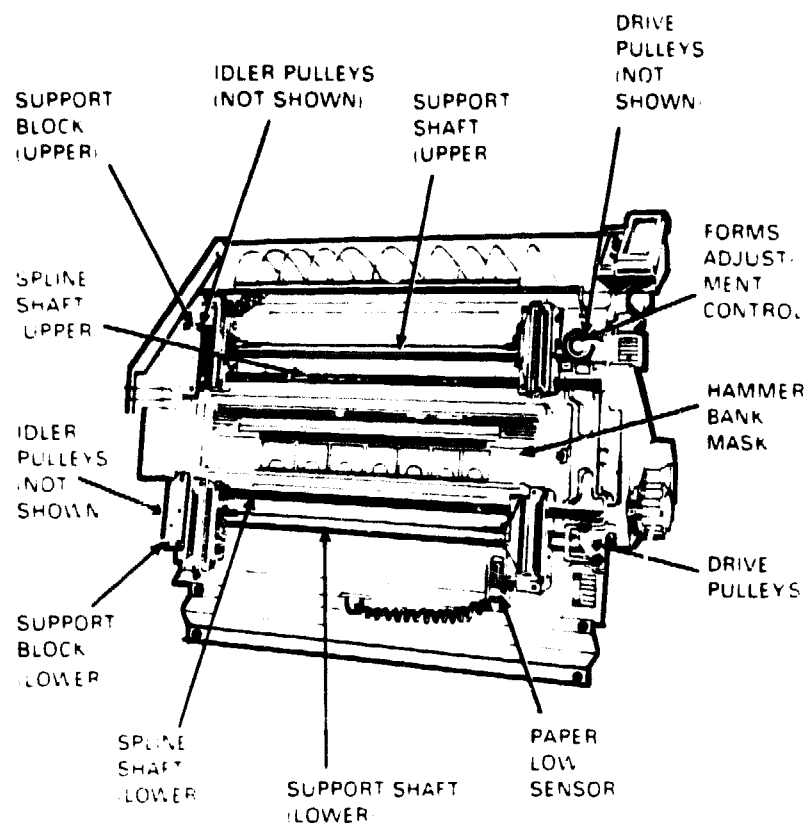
Tractor Cables and Paper Feed Assembly (Sheet 2 of 2)
